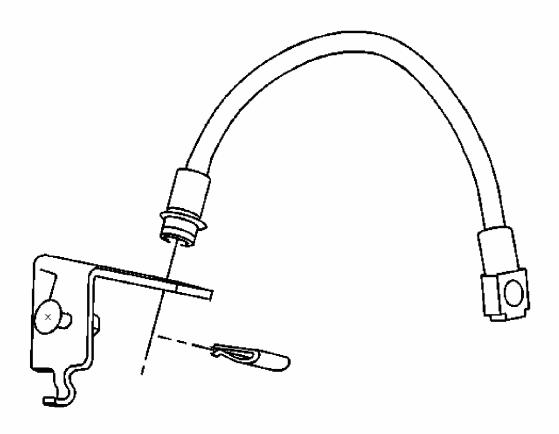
Removing/Installing Brake Hose From Brake Hose Bracket Courtesy of GENERAL MOTORS CORP.
